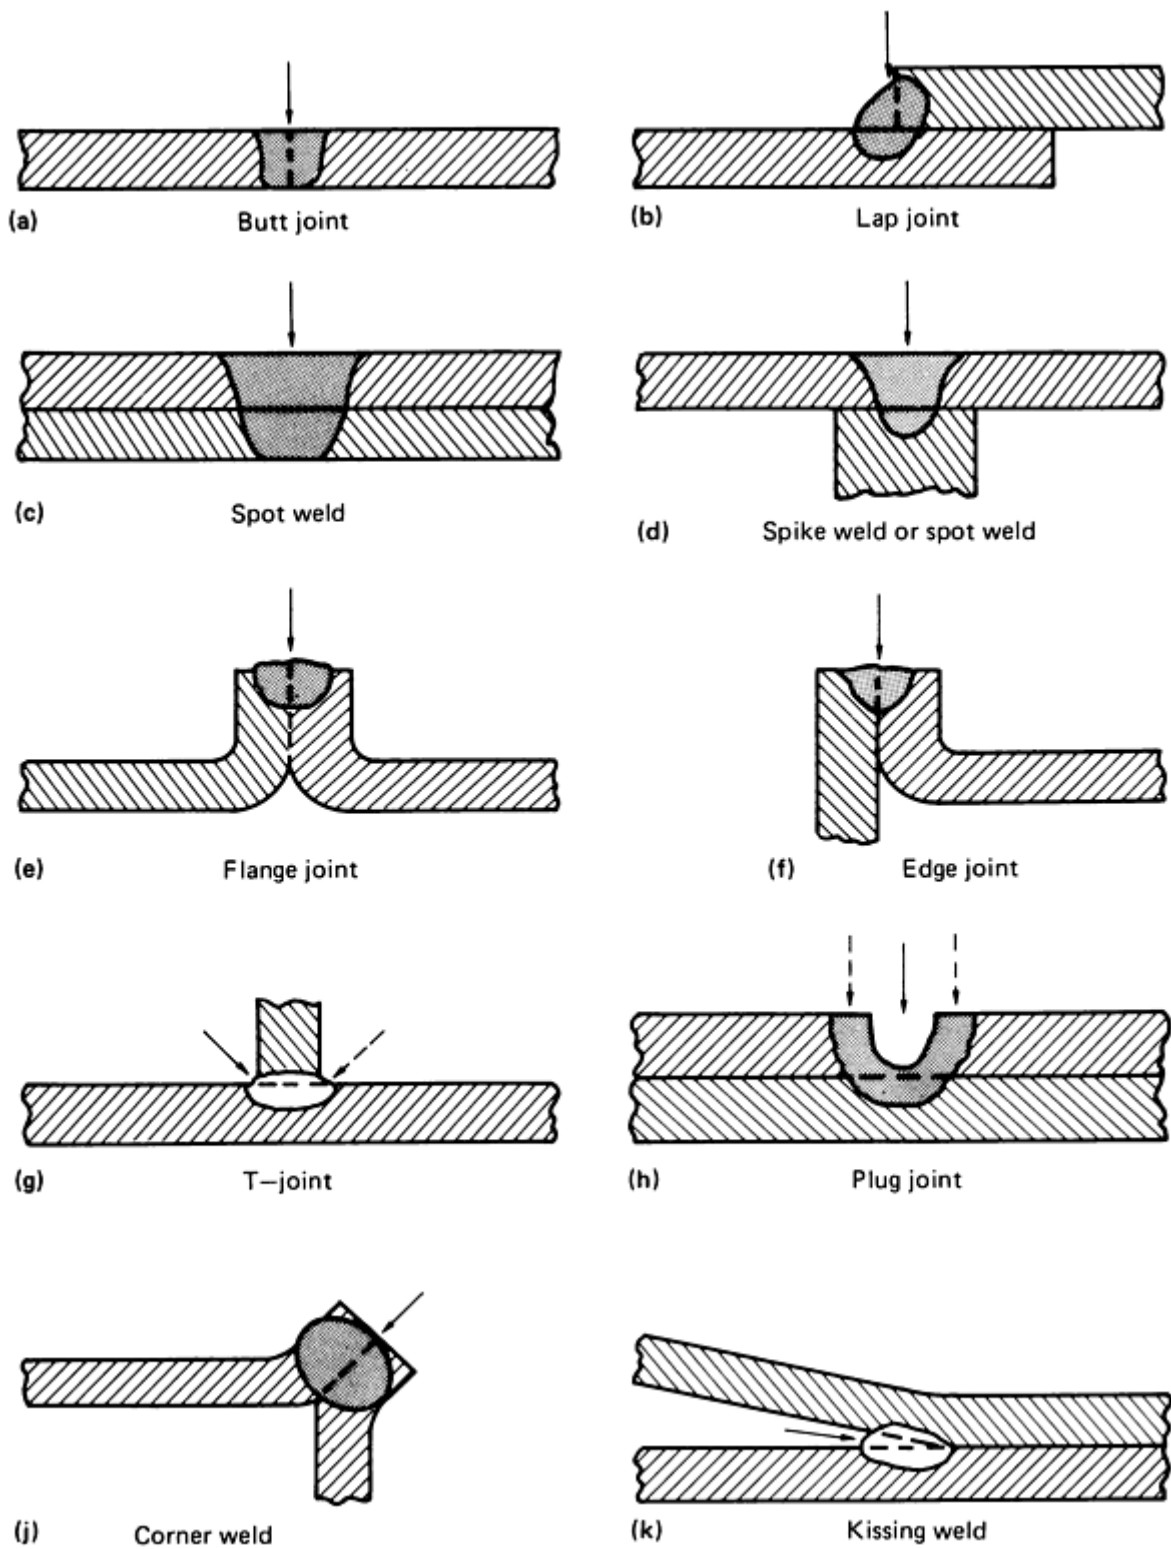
JOINT DESIGNS FOR LASER-BEAM WELDS ON SHEET METAL. ARROWS SHOW DIRECTION OF LASER BEAM. SOURCE: REF 23
